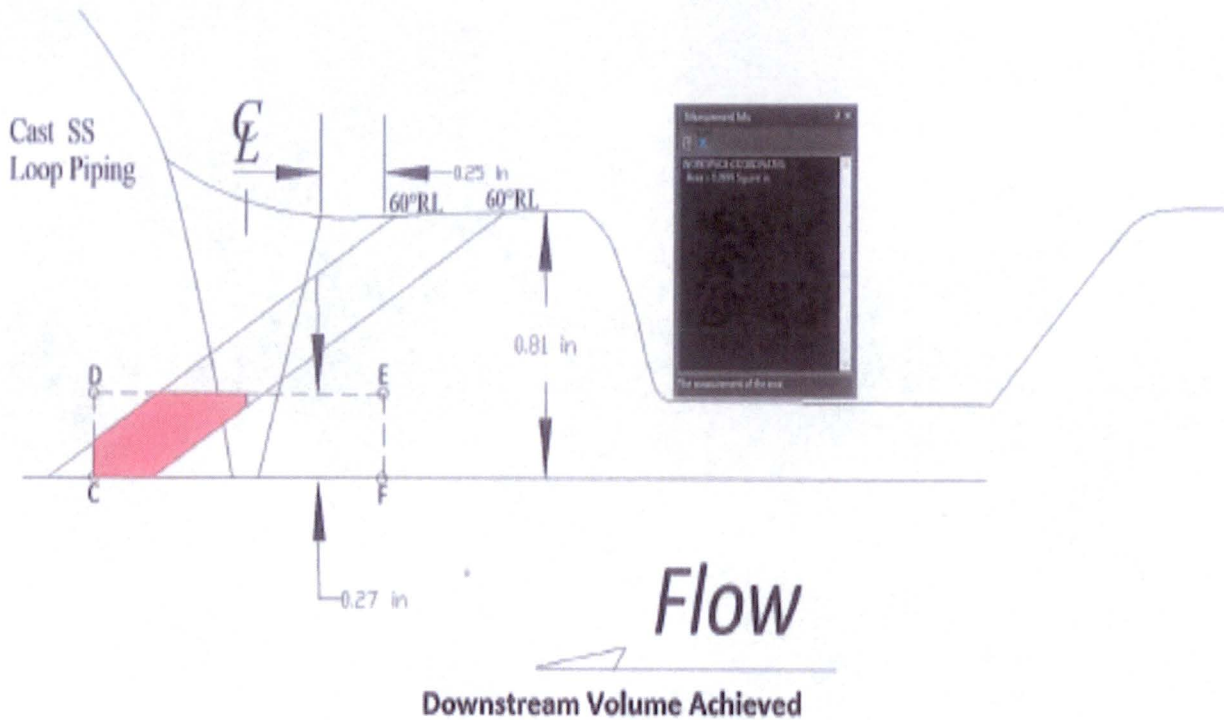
Weld 1-RC-1-14N Coverage Calculation
